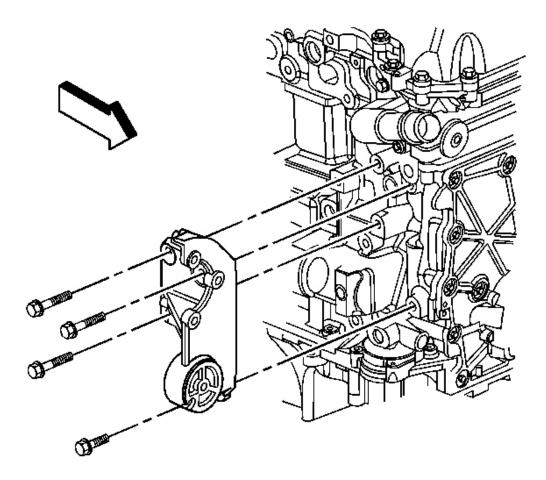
View Of Power Steering Pump Bracket & Mounting Bolts Courtesy of GENERAL MOTORS CORP.
